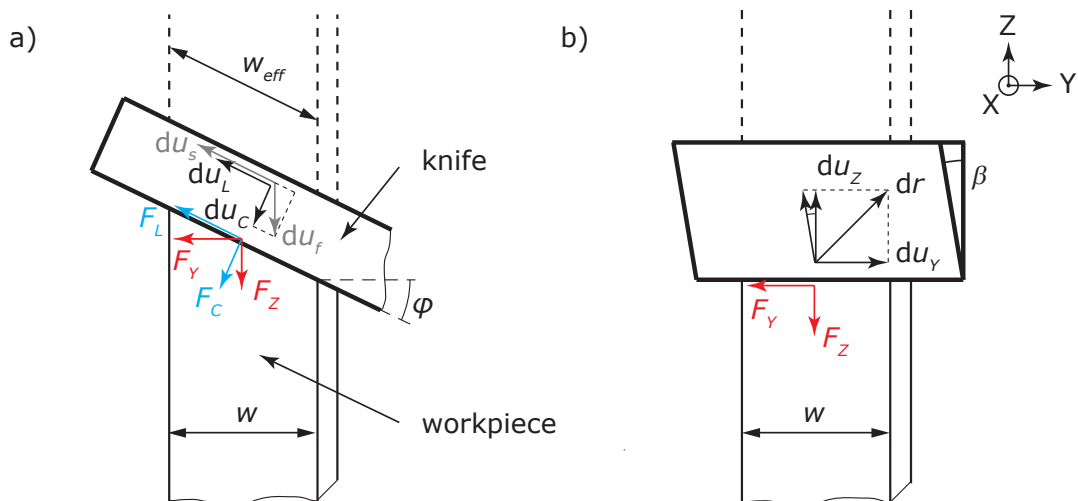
Model for forces between knife and workpiece [60, 61]. a) shows cutting with angled knife and b) shows cutting without angled knife.
